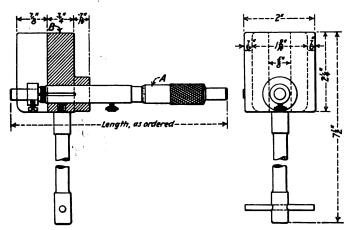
Inside Micrometer Calipers with Special Attachments for Measuring the Front or Rear Main Rod Jaw Space When Renewing Brasses
